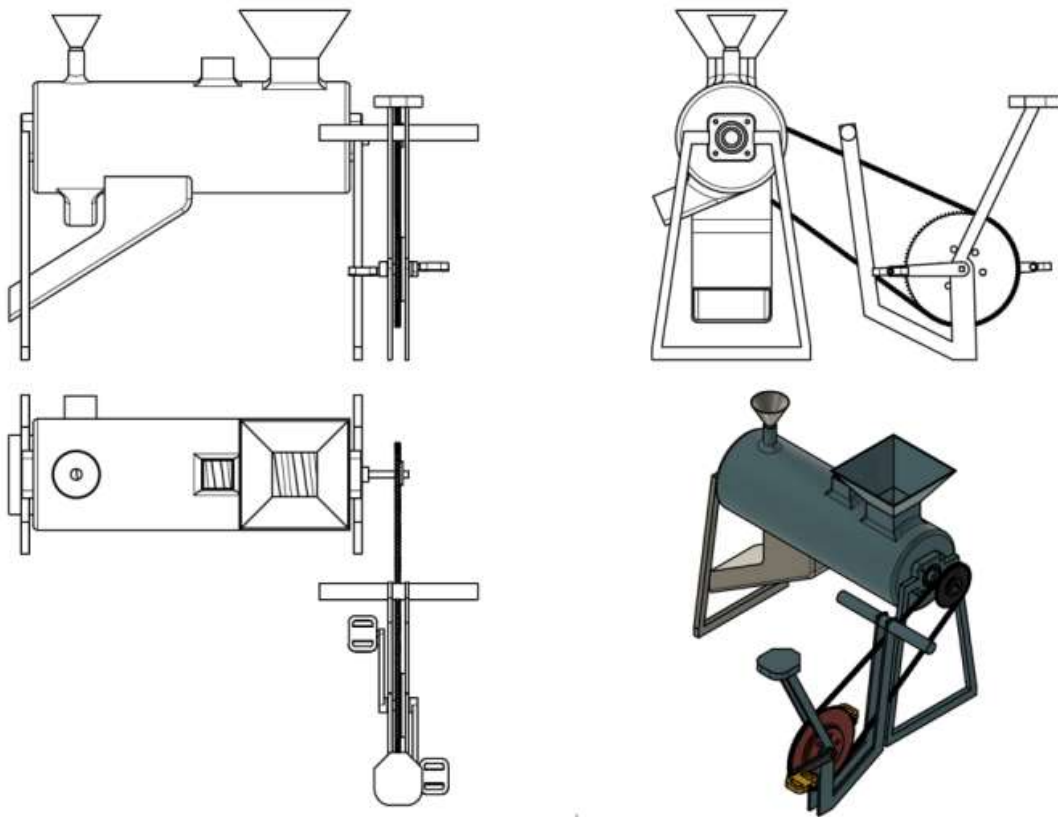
Different Views of the Pedal-Powered Locus Bean Dehulling Machine
